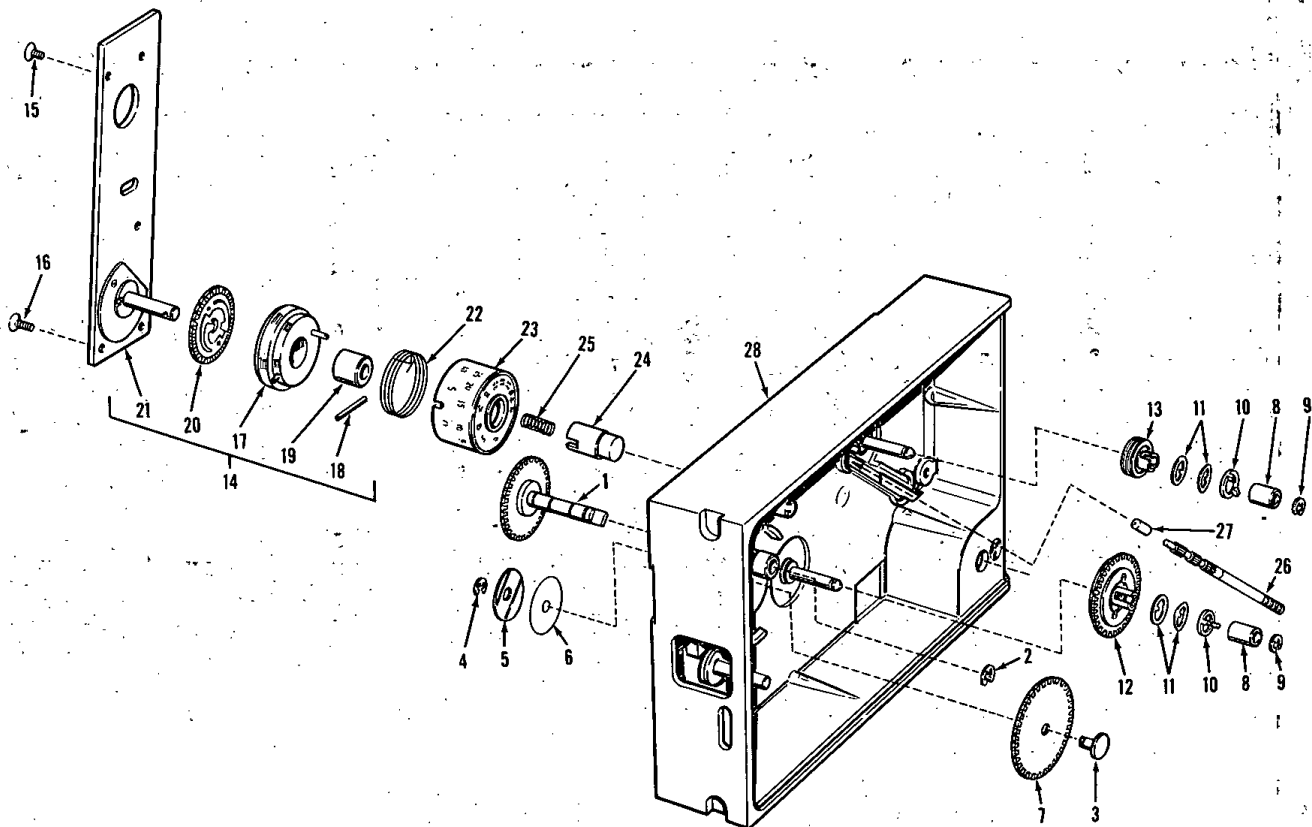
(Sheet 2 of 2) Exploded View of Magazine Assembly
